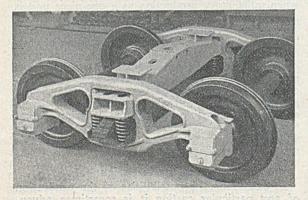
Side Frame and Bolster Assembly to form a Complete Bogie. Note the Clean Lines when this is Produced with Castings.
